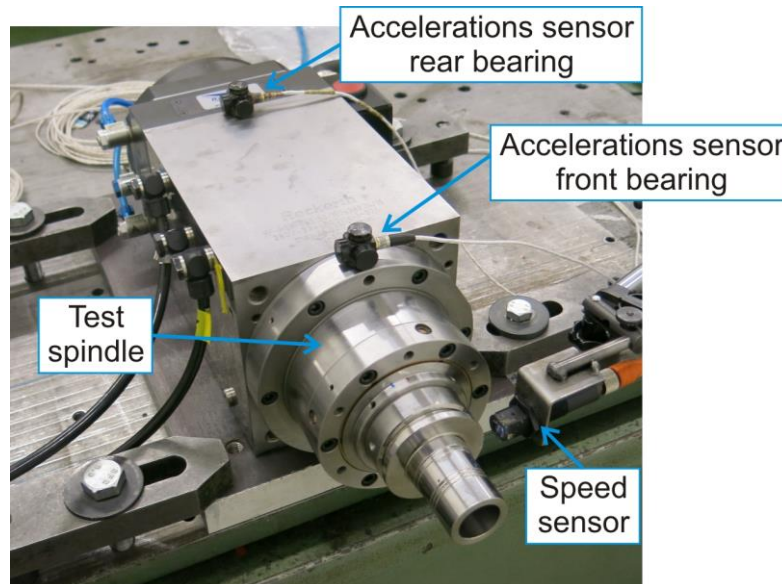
Test set-up for measuring the quiet running of spindle bearings
